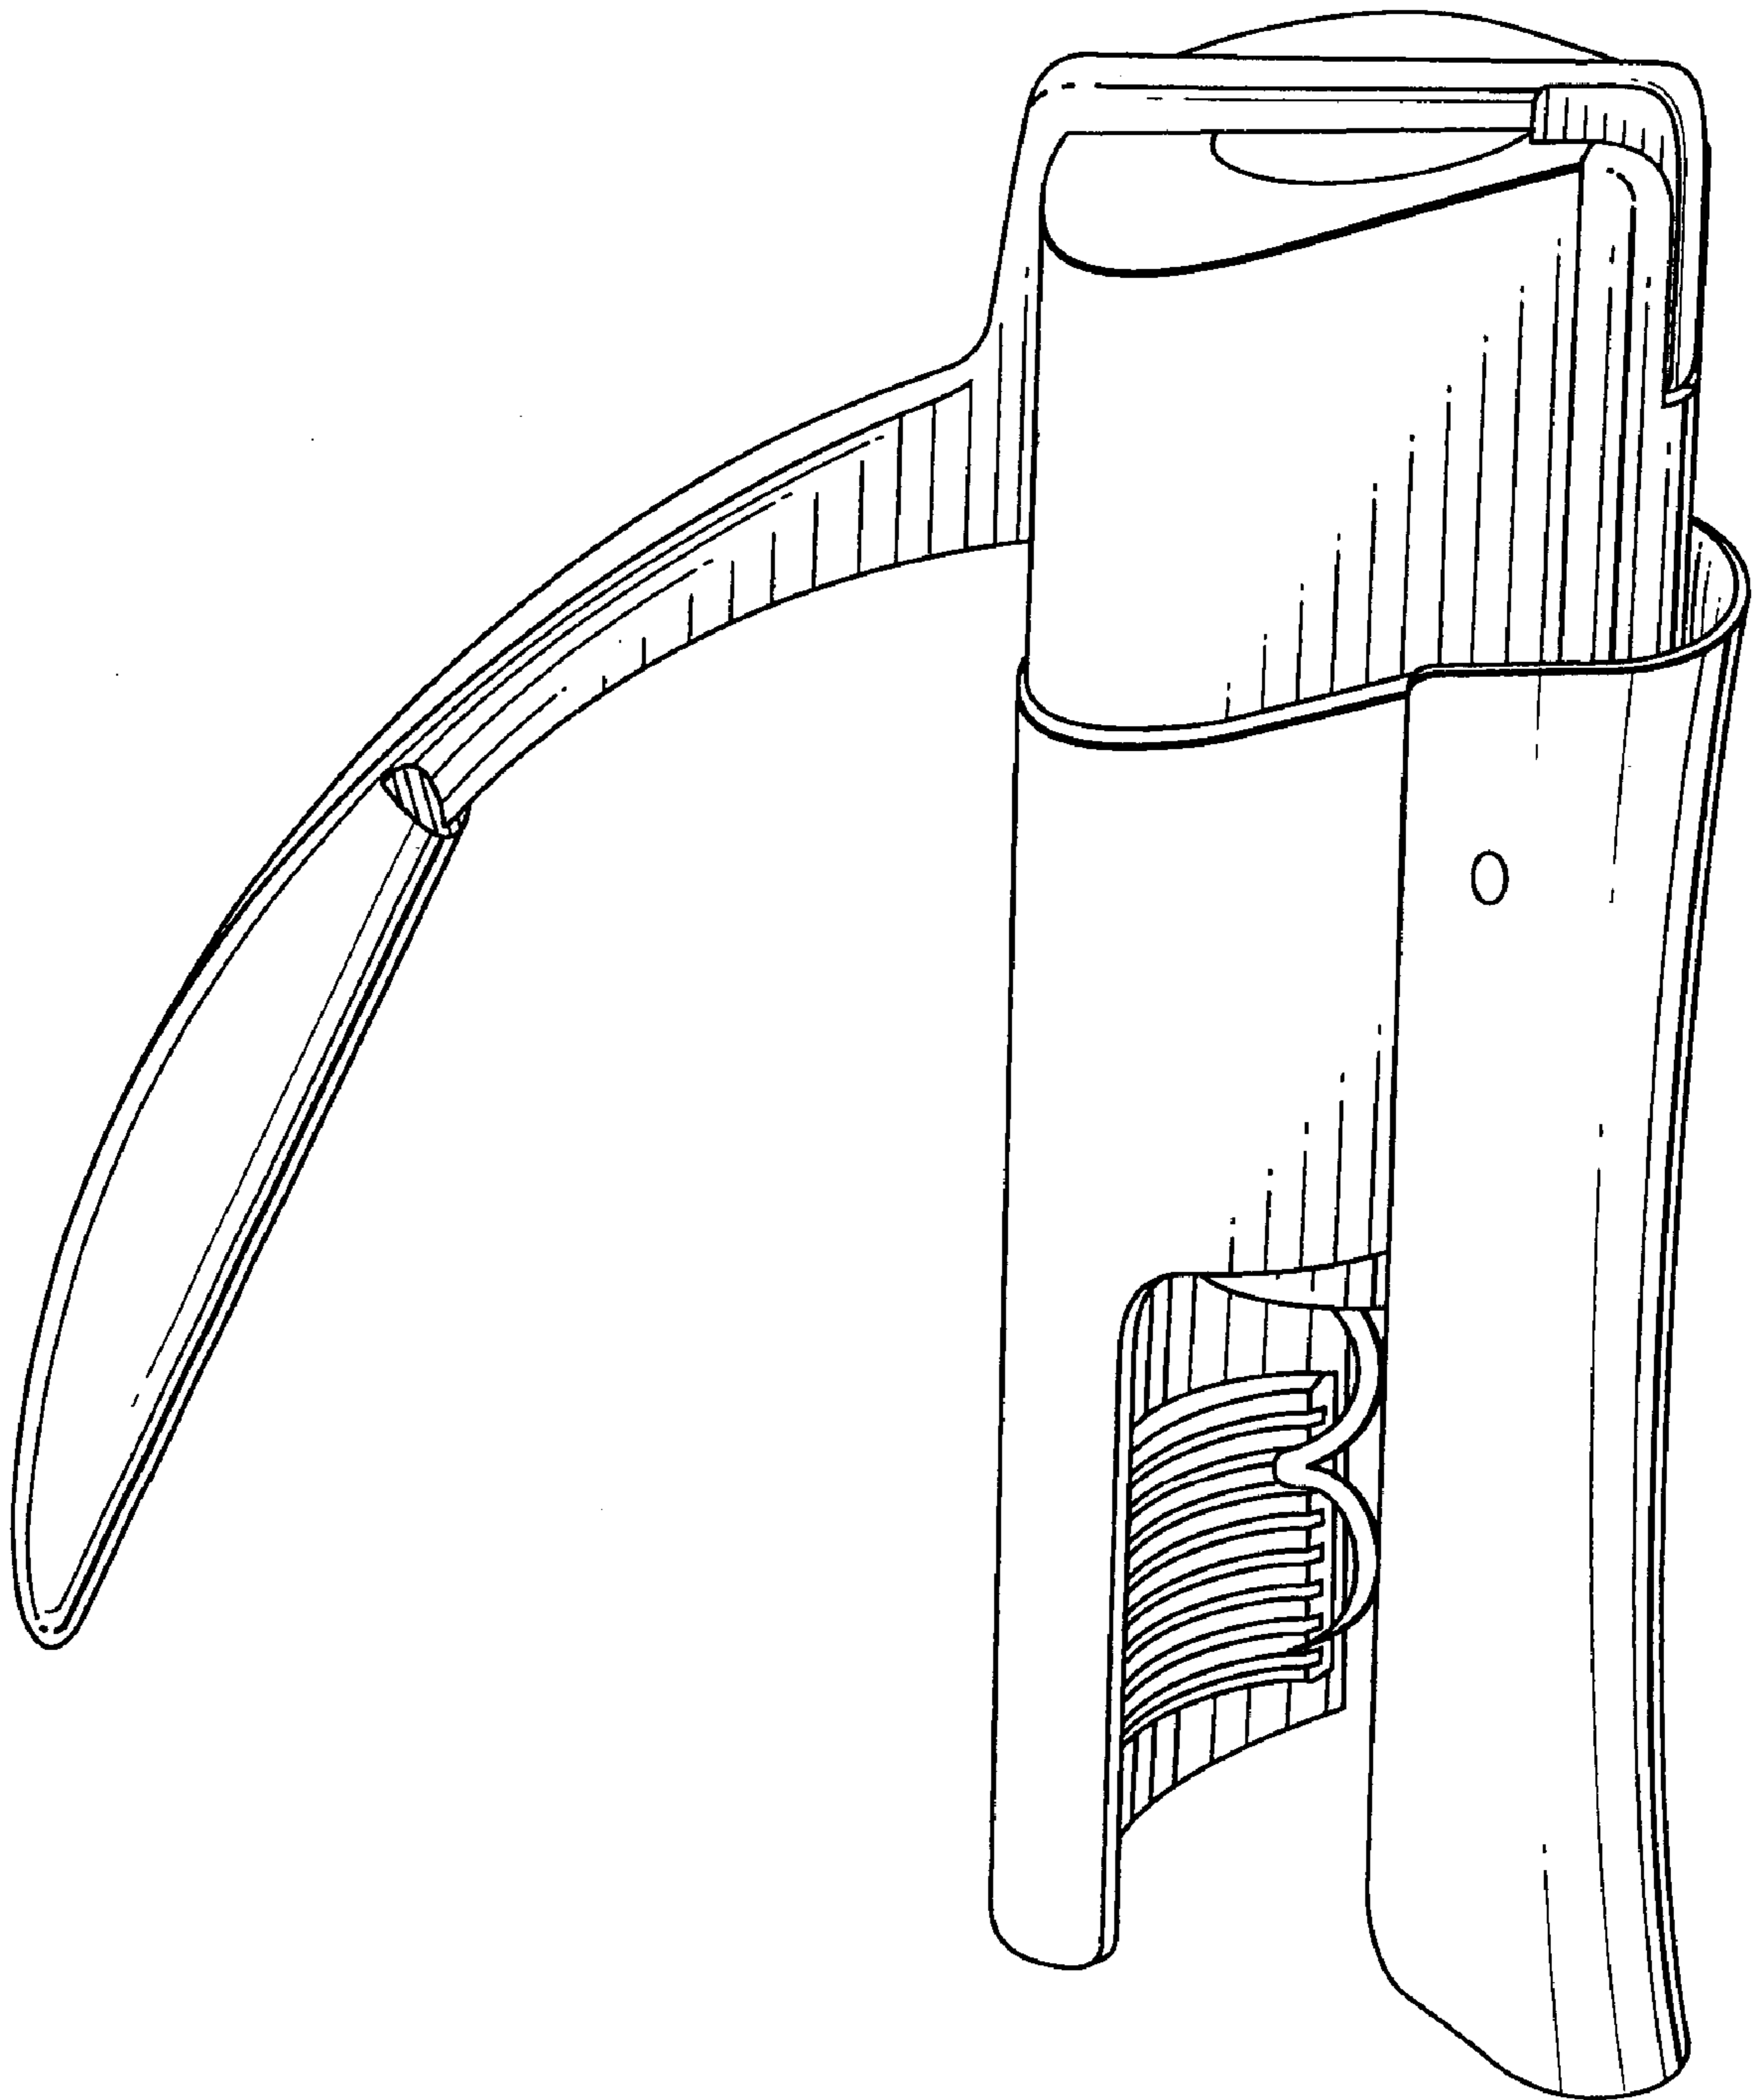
is a right side elevational view of the corkscrew of FIG. 8;
